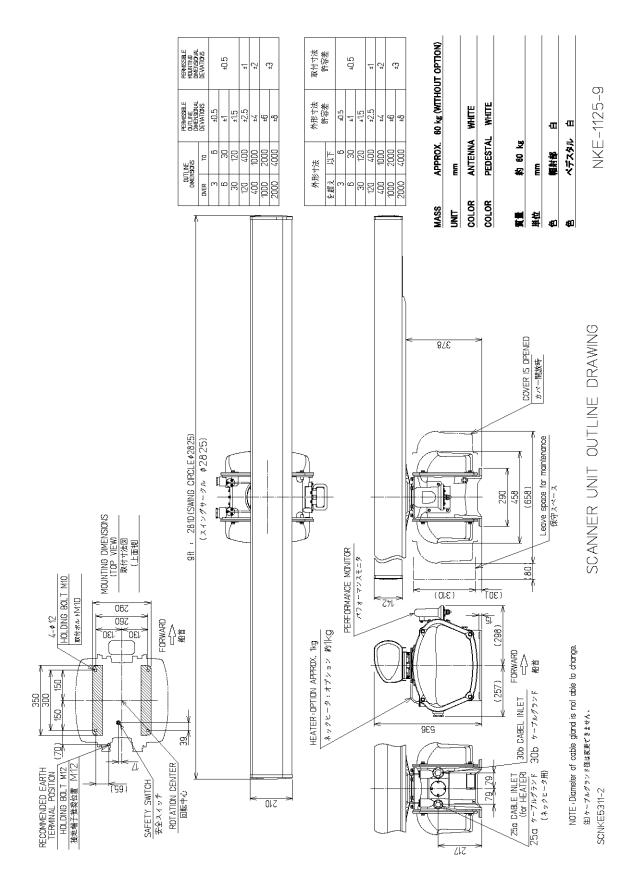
Outline Drawing of Scanner Unit, Type NKE-1125-9
